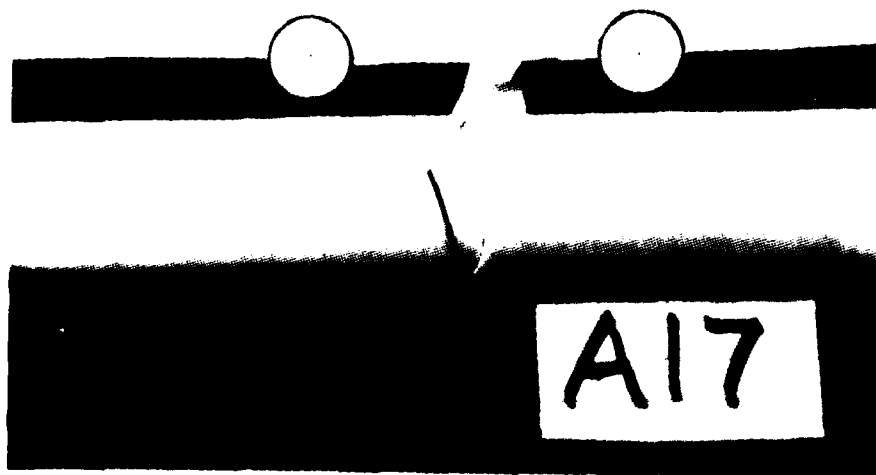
Two-Section Fracture with a Compression Axial Split in Alumina Specimen A17
